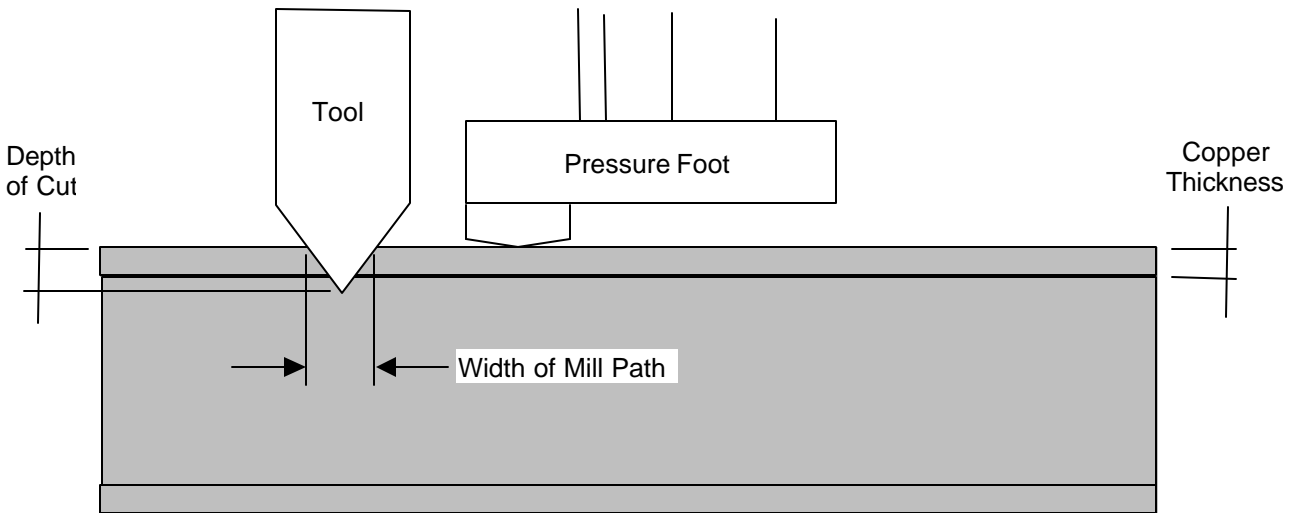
Setting the Depth of Cut of Pointed Milling Tool (magnified view of tool and board material)
